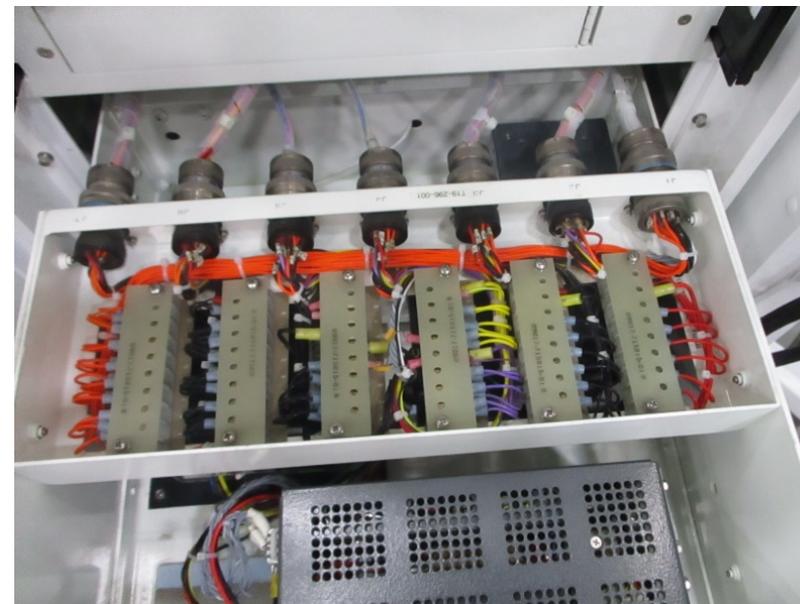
Plug-In Module Assembly (Cut 2) (Rev. 2)
